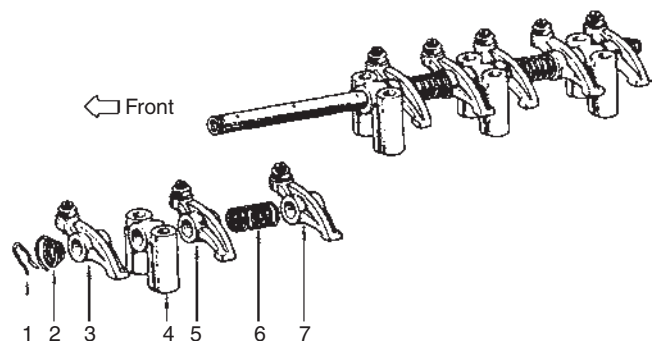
Rocker shaft assembly for a four-cylinder engine (Toyota)
